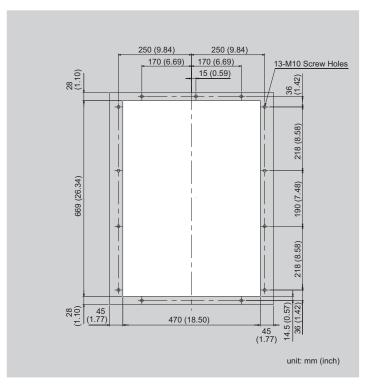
Panel Cut-Out Dimensions (CIMR-A□4T0208U)
